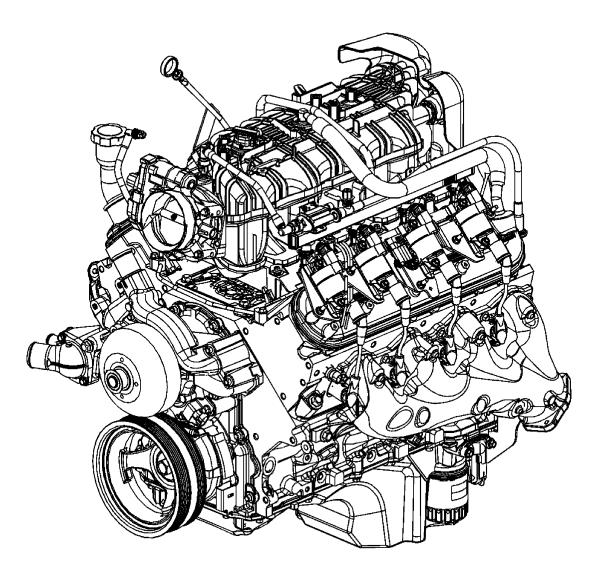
View Of Engine Courtesy of GENERAL MOTORS CORP.
